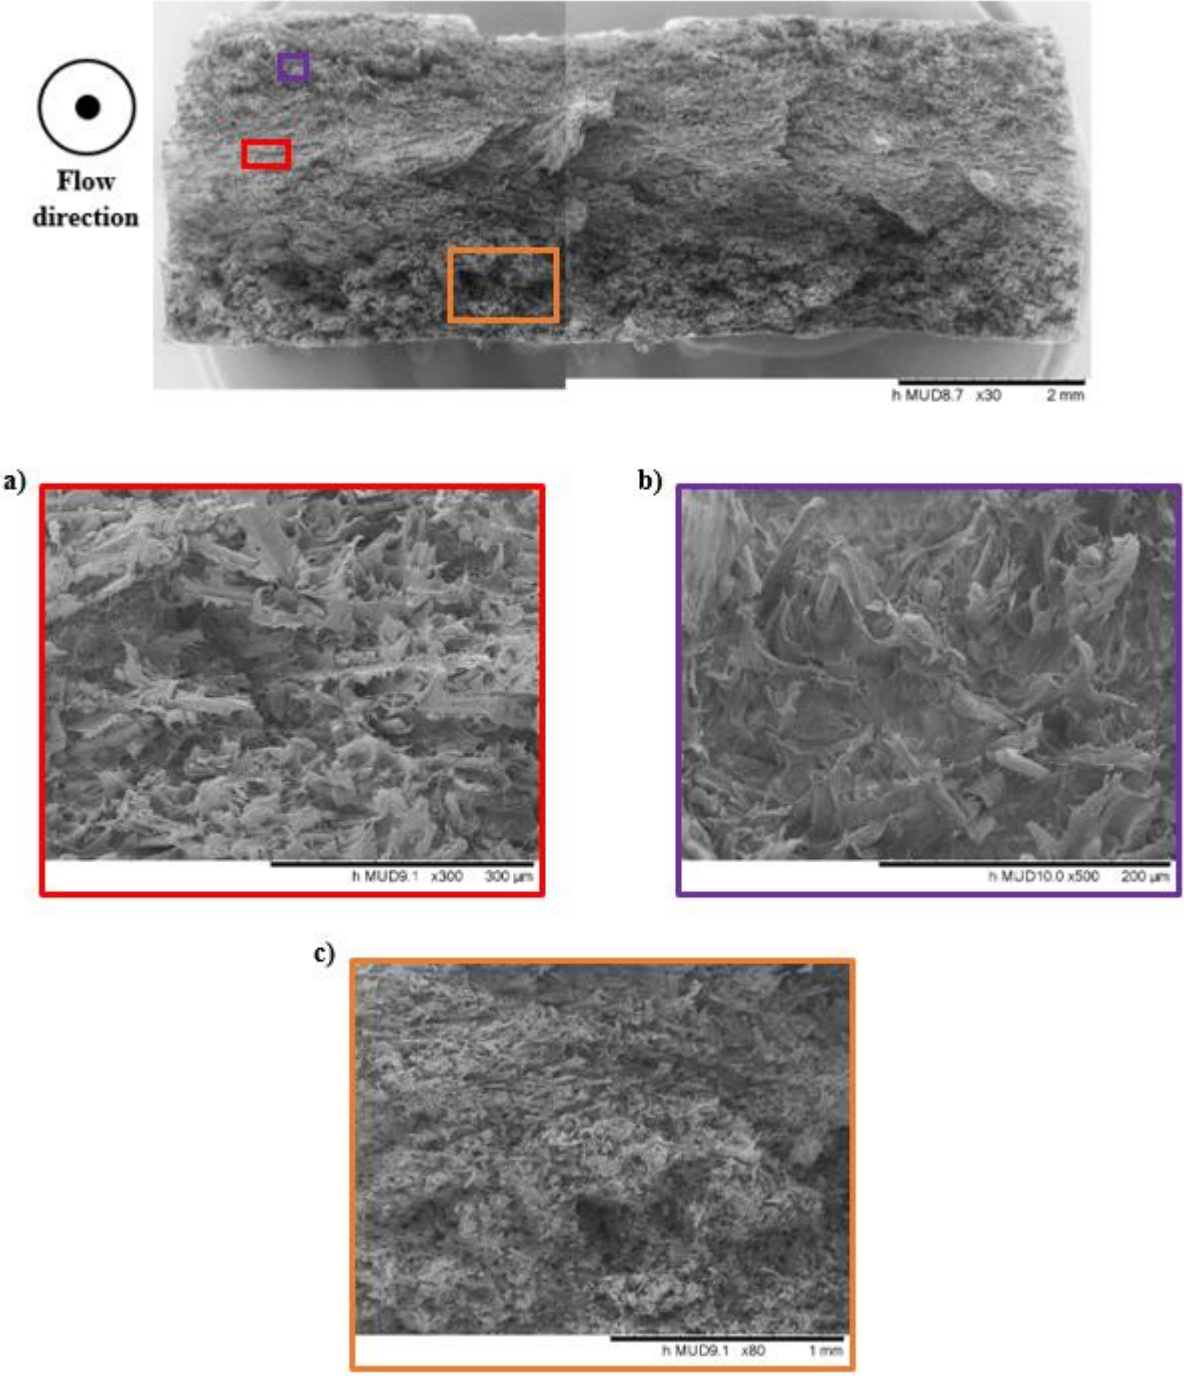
Fracture surface of a fatigue 0° specimen at 100° C
